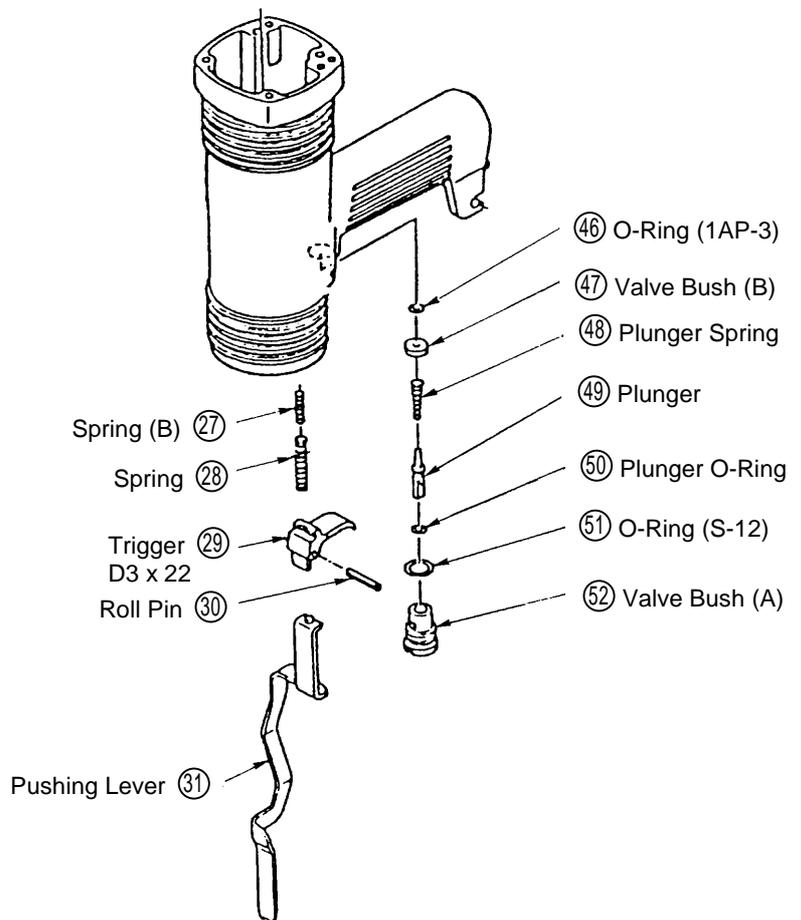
Disassembly and Reassembly of the Push Lever, Valve Bushing (A) and related parts
